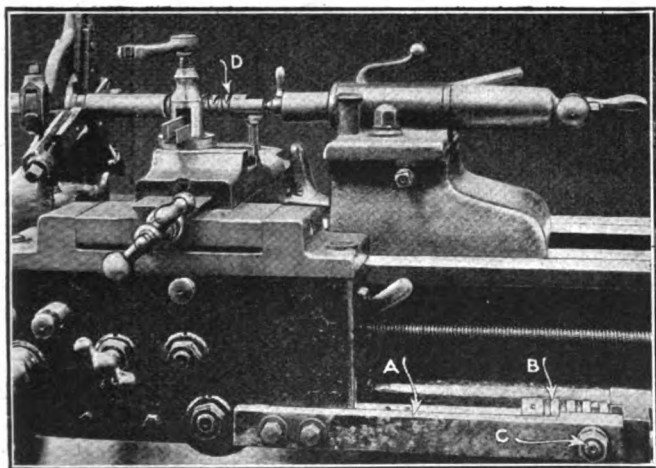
LATHE RIGGED FOR CUTTING DIAMOND SCREWS (FRONT VIEW)
